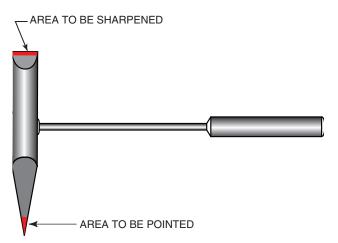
Welder's chipping hammers work best and are safer to use if the head is sharpened periodically.
